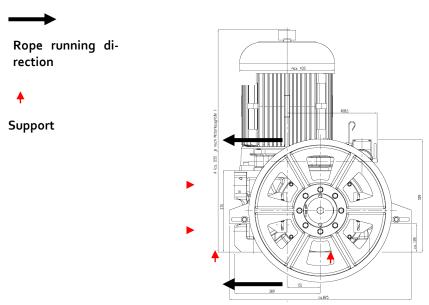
Installation position B1, motor standing, rope running direction horizontal, fixing below with additional side support.
